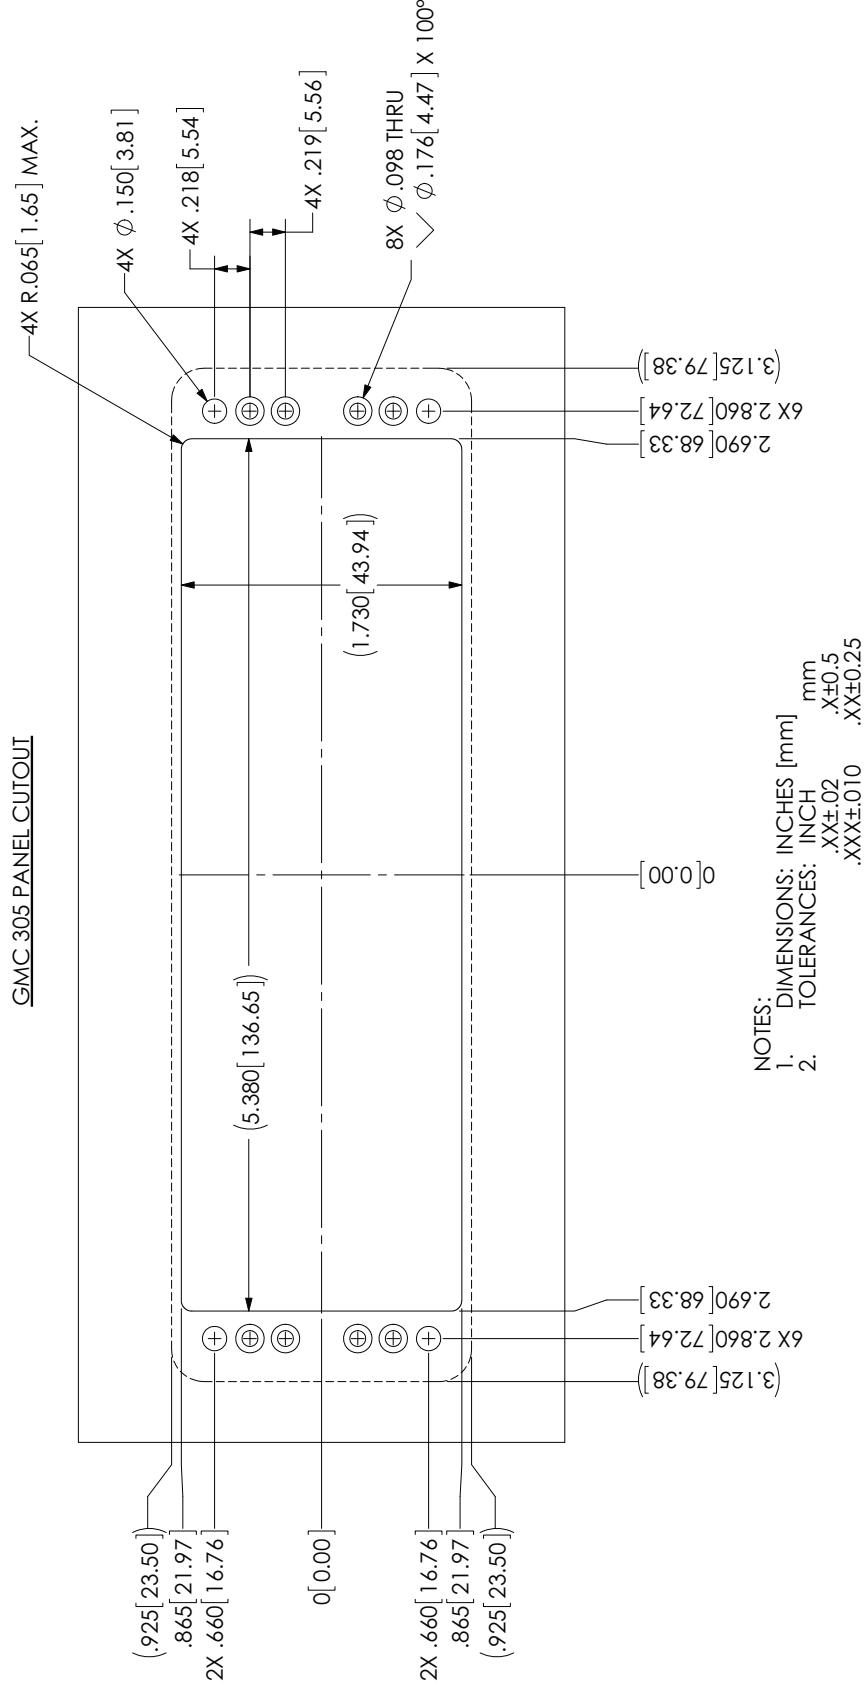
GMC 305 Cutout Drawing (Not to Scale)
